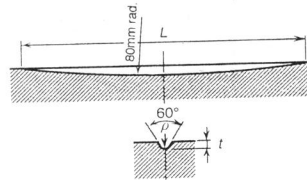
Smooth specimen geometry; dimensions in millimeters.
